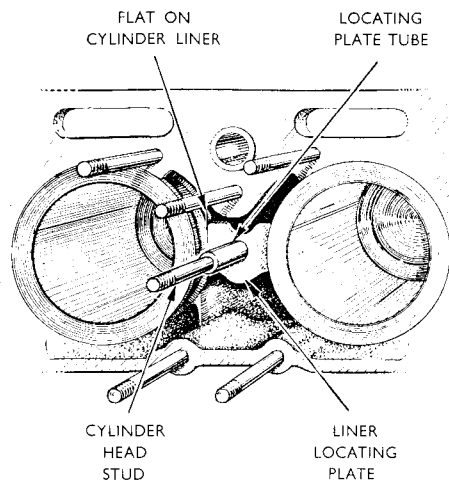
CYLINDER LINER LOCATING PLATE IN POSITION
